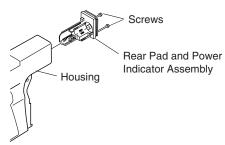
Attaching Rear Pad and Power Indicator Assembly
